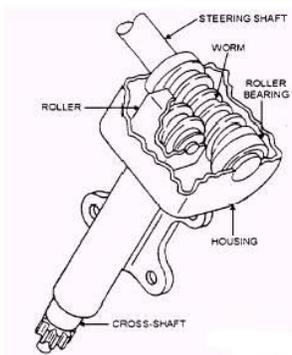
Worm and roller steering gear Fig -10: Worm and sector steering gear
